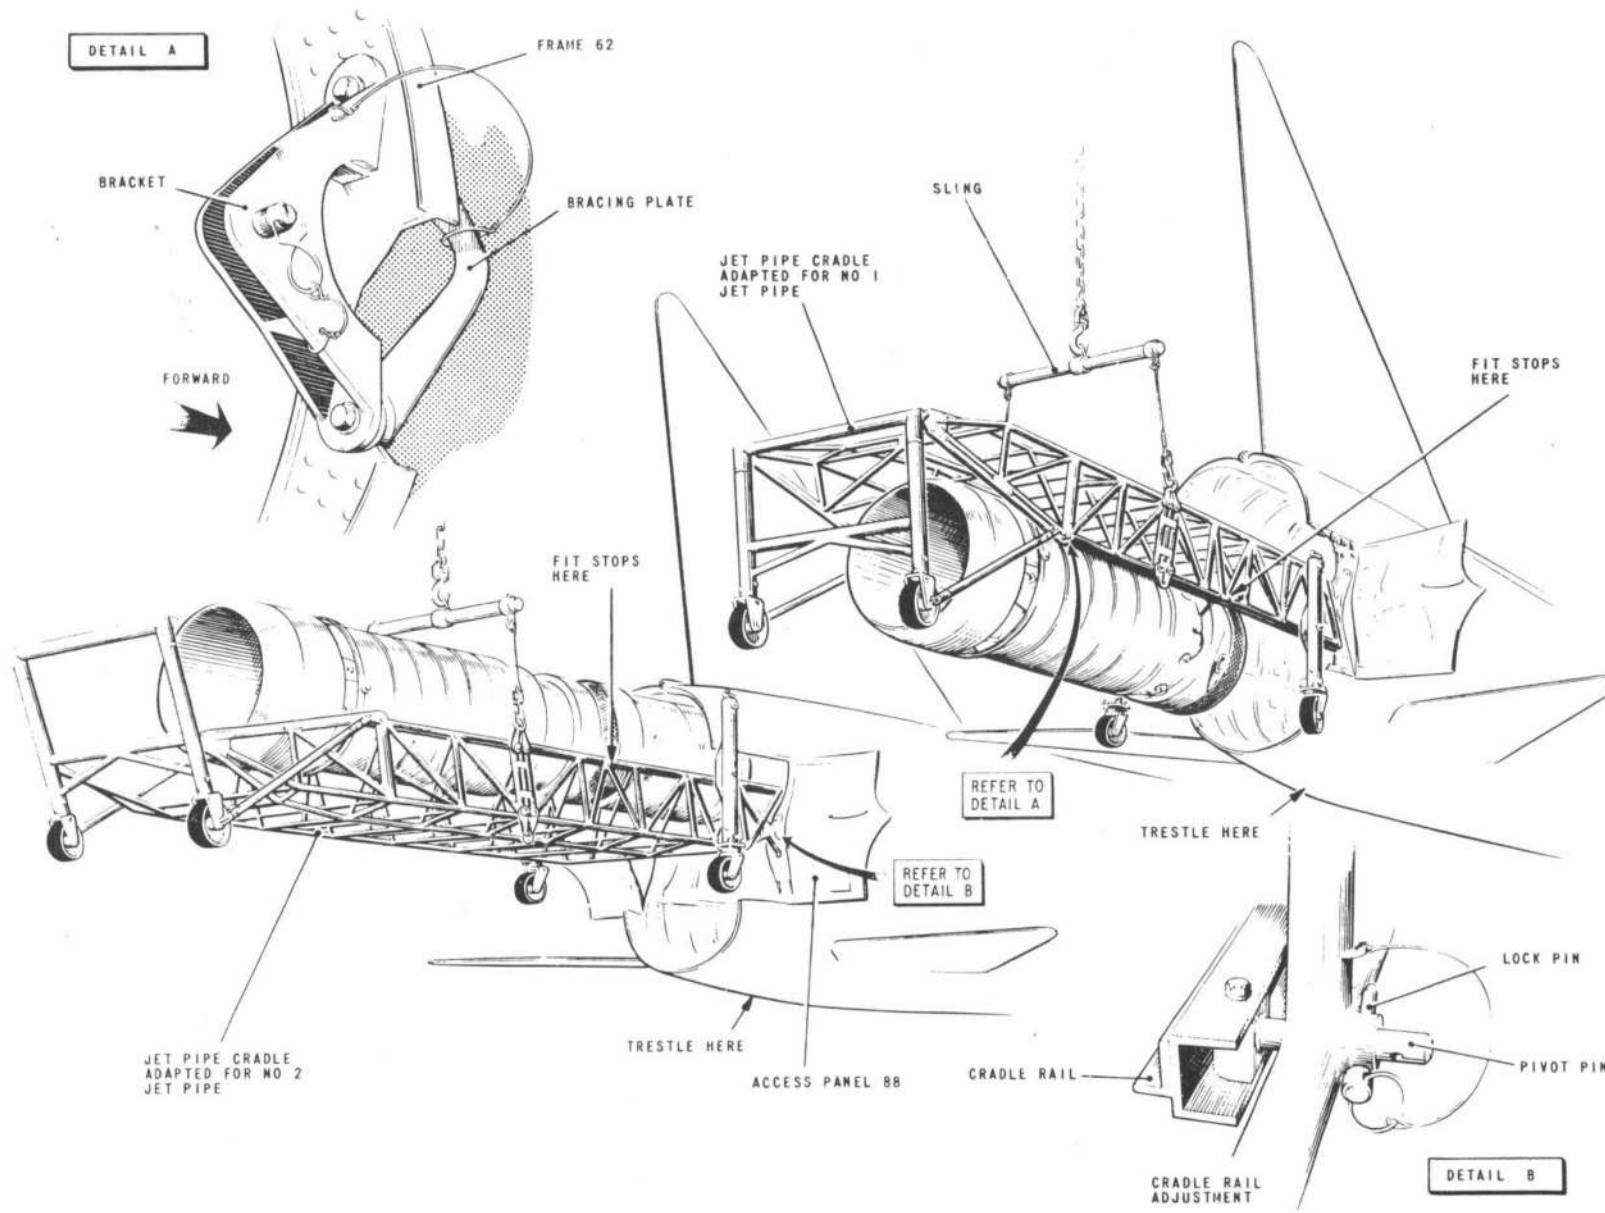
JET PIPE -REMOVAL AND ASSEMBLY (2)
